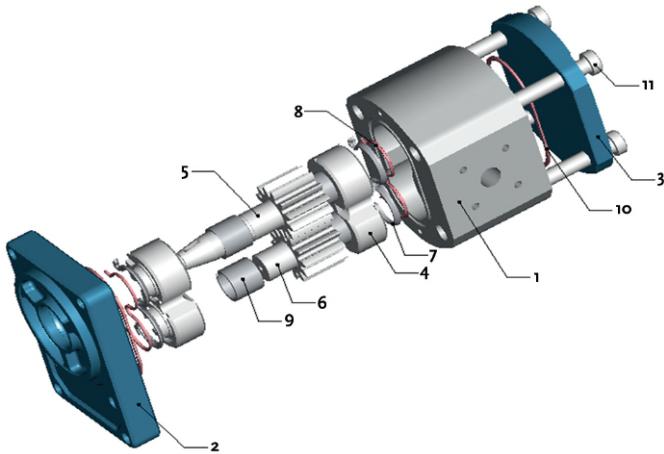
B Exploded view of an external gear pump (Courtesy of Bosch-Rexroth)
